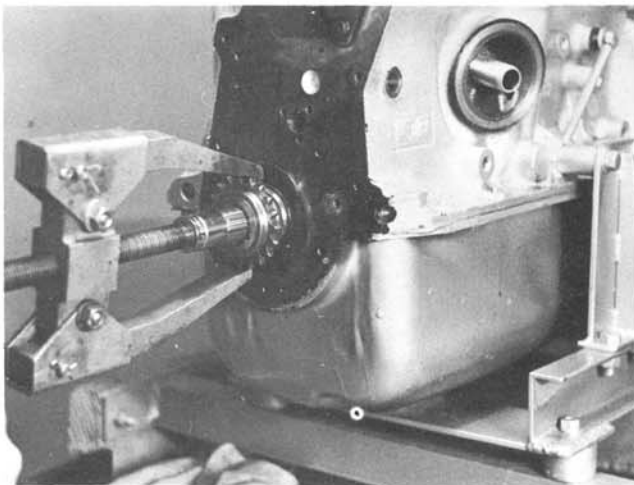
REMOVING CRANKSHAFT SPROCKET
